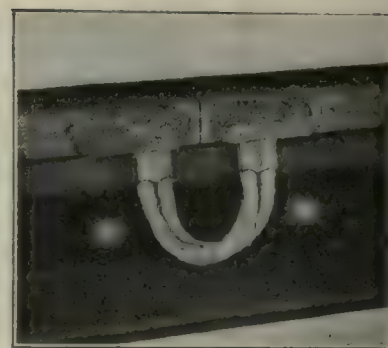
ELECTRIC RAILS AND WELDED ON BOND
